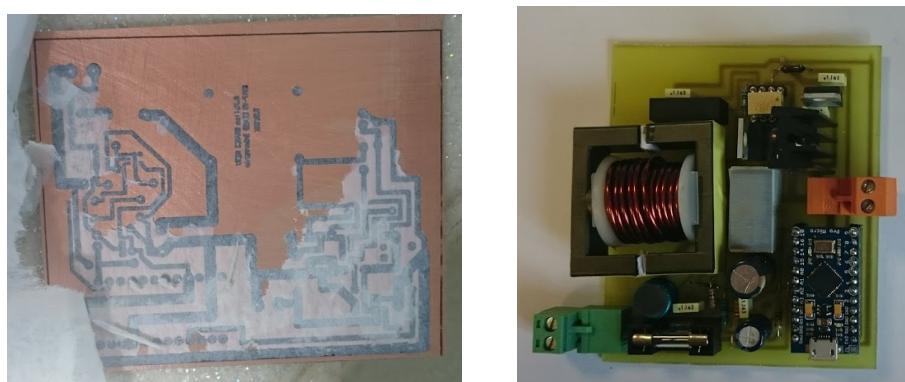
(a)Bare Board(Left) (b)Soldered Board(Right)
